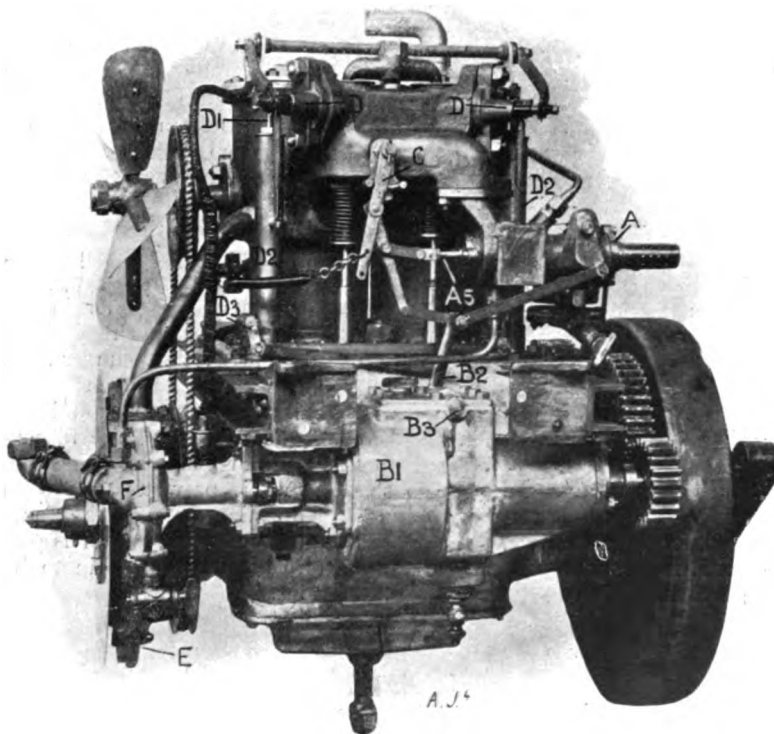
View of the Twin-Cylinder 16-h.p. Albion Engine, from the Left Side, showing the Governor Control on the Carburettor and Ignition.
